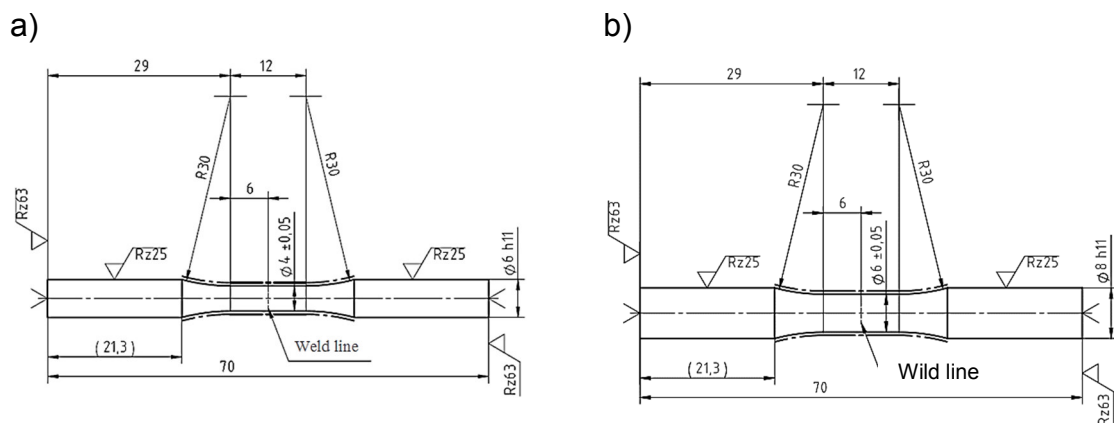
Fatigue specimen (dimensions in mm) for a) Ti-weld and b) AISI 316L to AISI 1012-weld.
